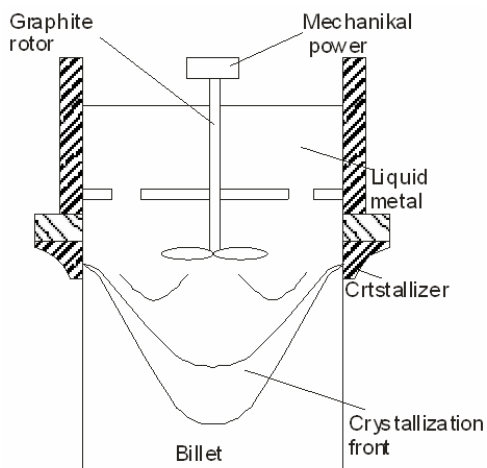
Schematic representation of a HOT-TOP mould with arm for mechanical stirring
